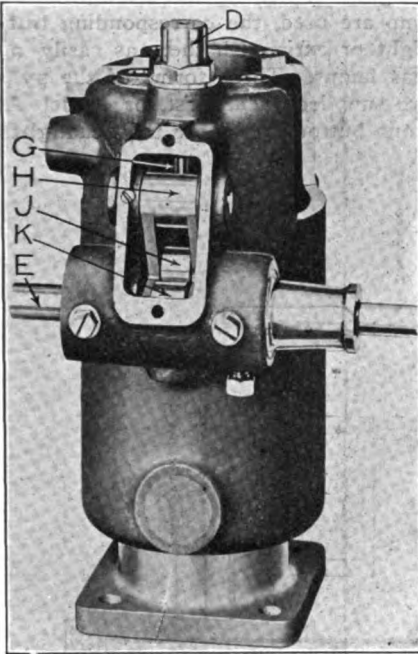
SPHINX VALVE GEAR FIG. 2—DETAILS OF SPHINX MOTOR CONSTRUCTION
